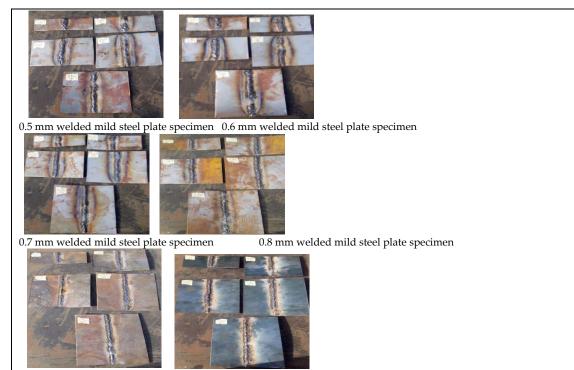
Welded mild steel plate specimens using the developed welding robot
